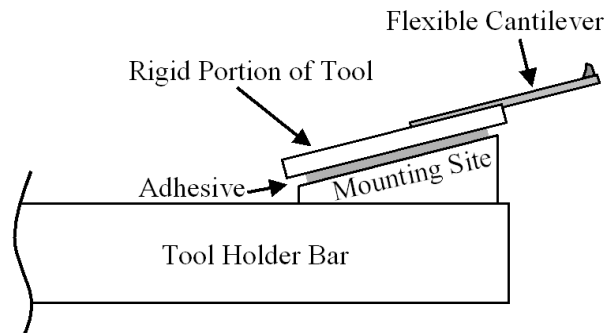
Mounting of a flexible tool to the tool holder bar
